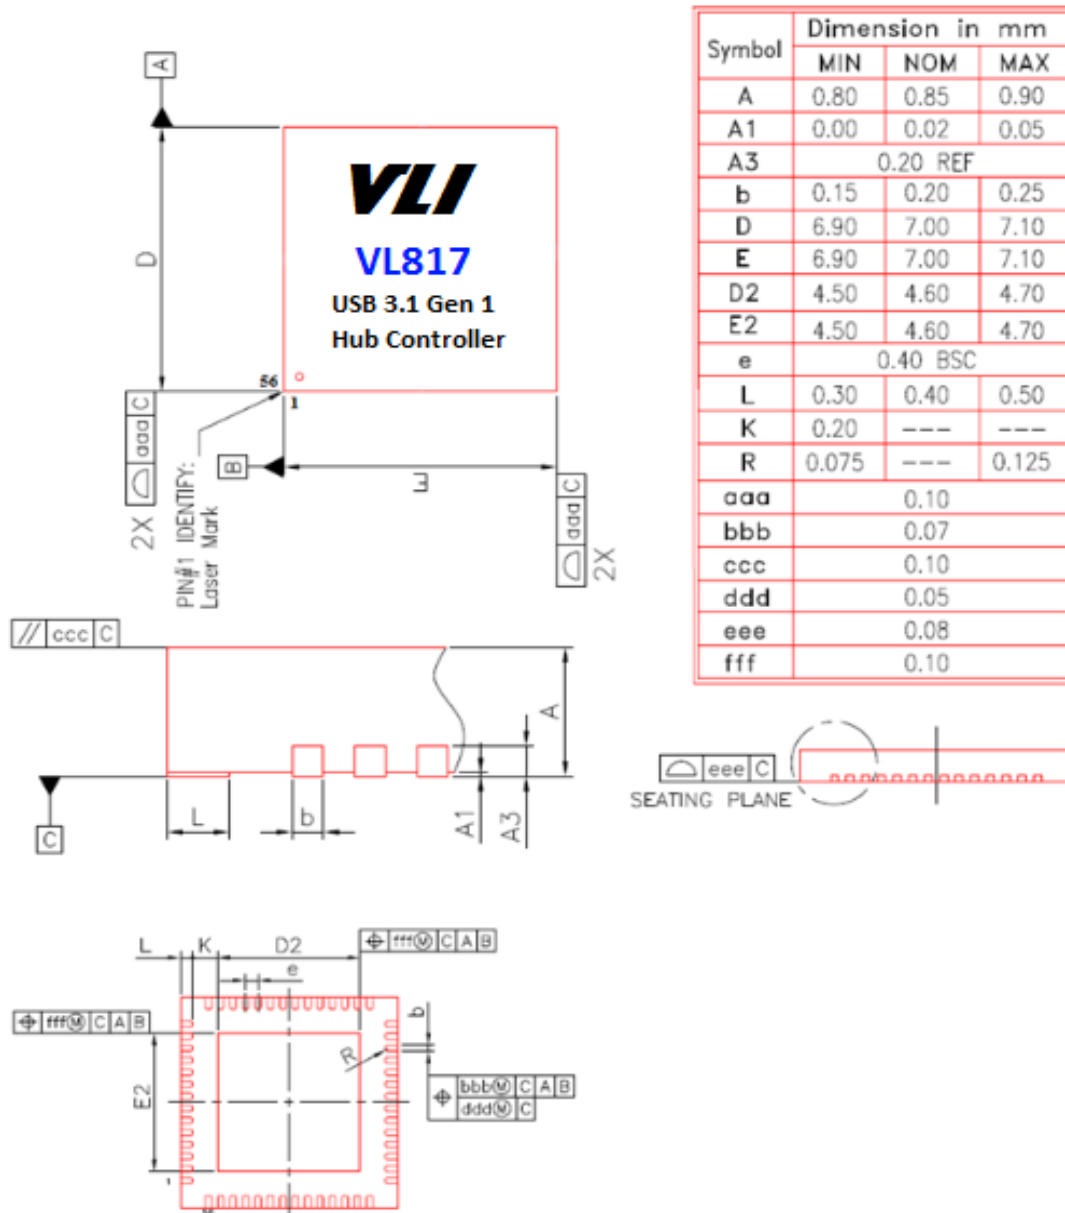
Mechanical Specification – QFN 56L 7x7x0.85 mm Package
